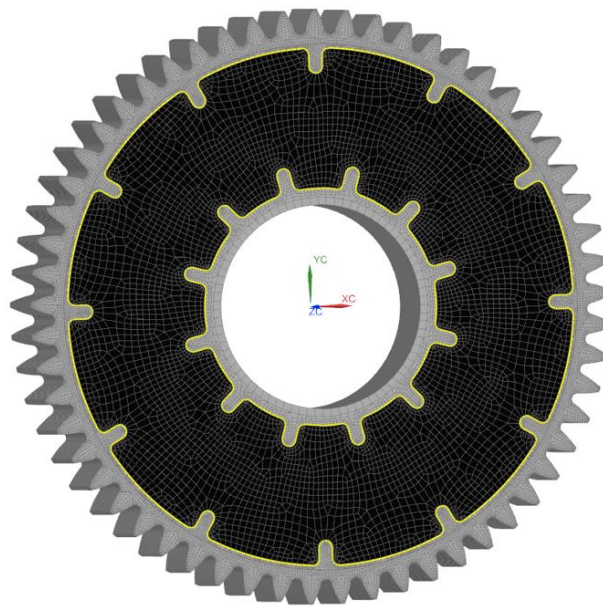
21 FE model of the hybrid gear assembled by adhesive bonding.
